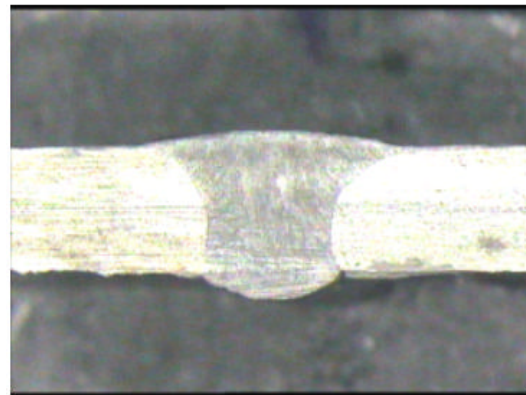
Bead profile of weld (optimized parameters)
